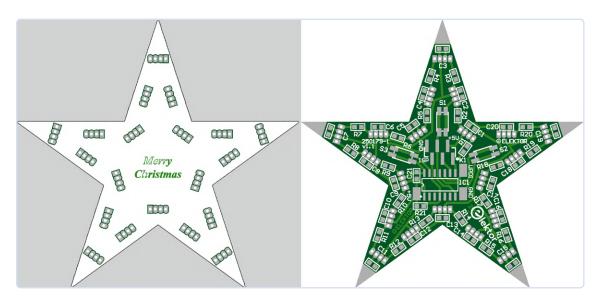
The top side (left) and the bottom side (right) of the PCB layout.
